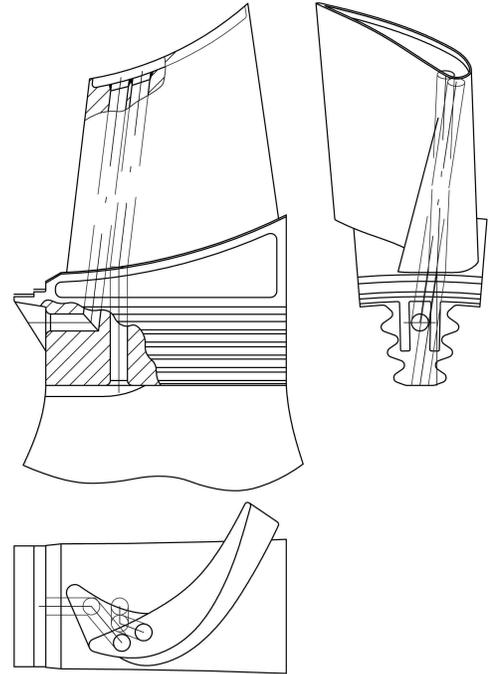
HTT blade design drawing, steam cooling ICS-slits and supply hole arrangement
